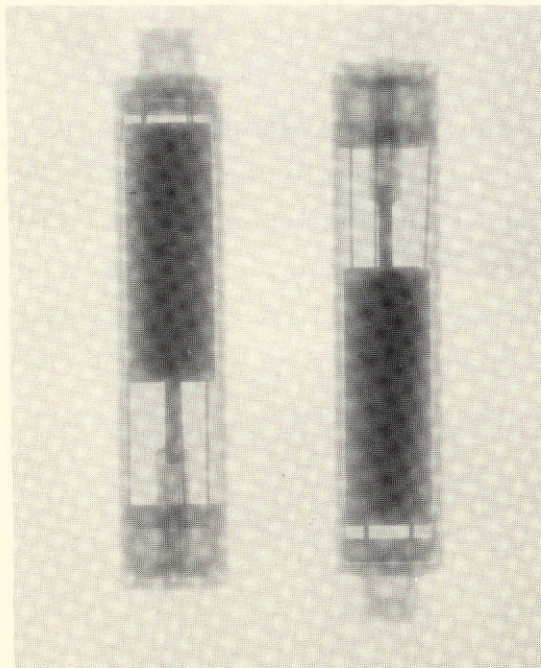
RADIOGRAPHS OF CAPSULE 1 AND 2 PRIOR TO ASSEMBLY IN CAPSULE SHROUD
